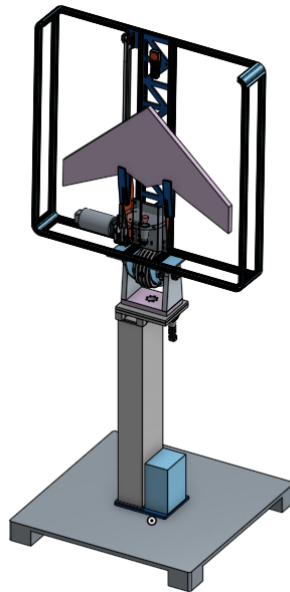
Isometric view of the worm gearbox launcher, designed with *Onshape*.
